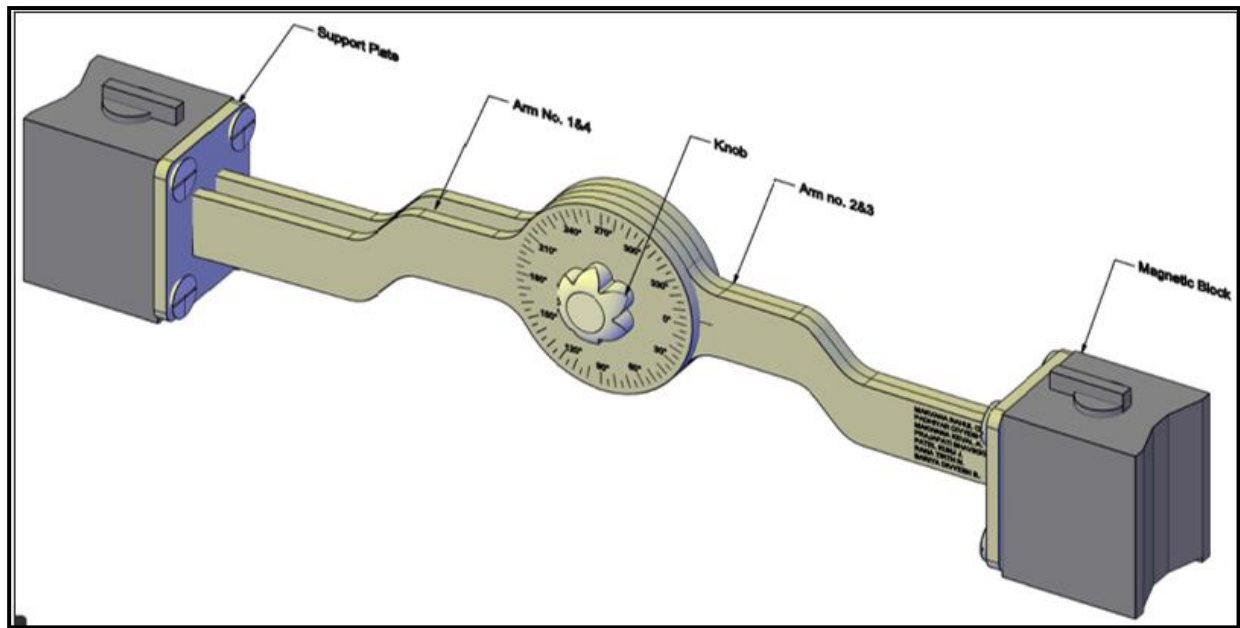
CAD Model of Multi Angle Magnetic Welding Fixture
